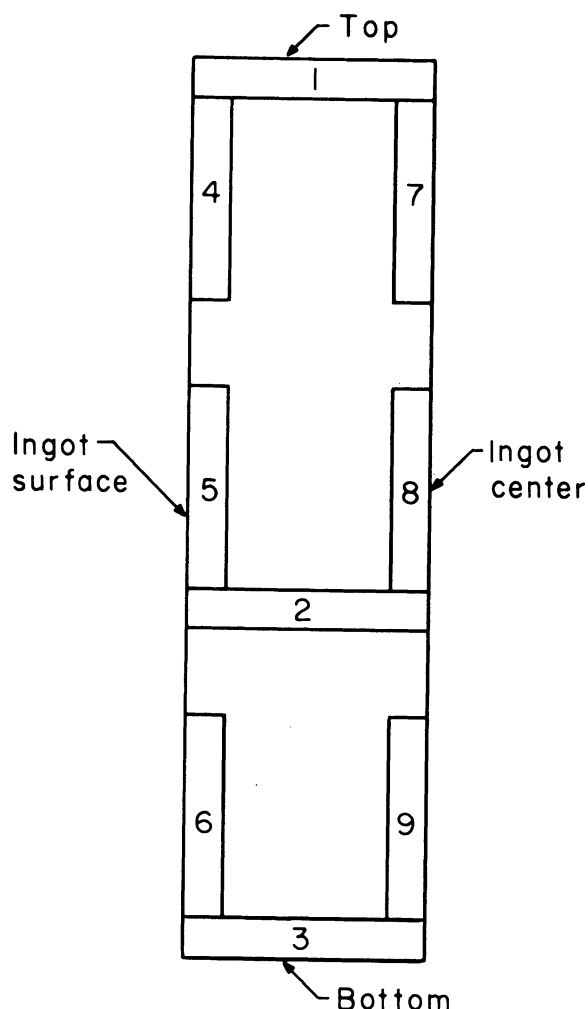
Layout for cutting coupons for machining Charpy V-notch specimens from as-cast sections removed from slab ingot 17.8 by 50.8 cm (7 by 20 in.) in cross section.
